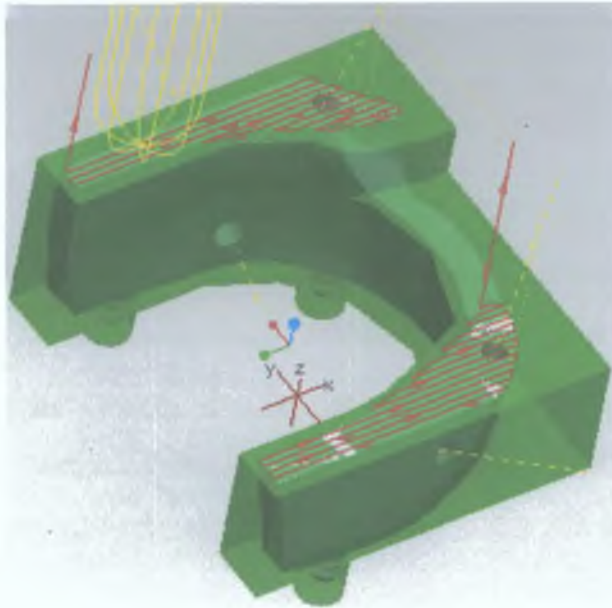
Surface Mill Sequence ProEngineer Tool Path.
